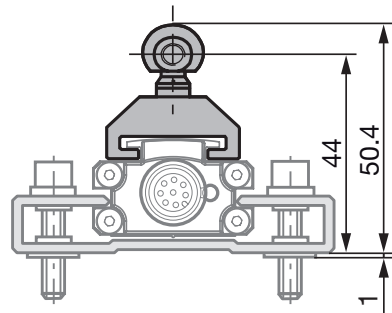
Dimensions and distances with BTL5-F-2814-1S magnet
